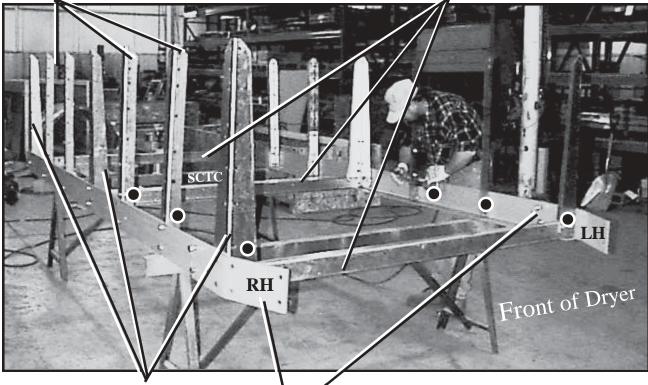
RH corner legs side rail angles (RH and LH) secondary cross tie channel (SCTC)
